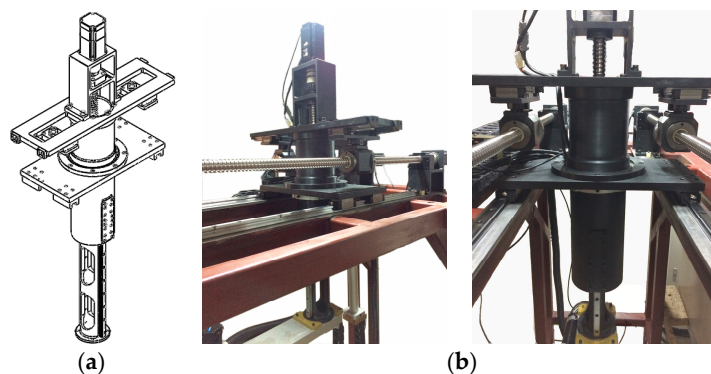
Vertical axis assembly of the improved platform: (a) design structure; (b) physical structure.
